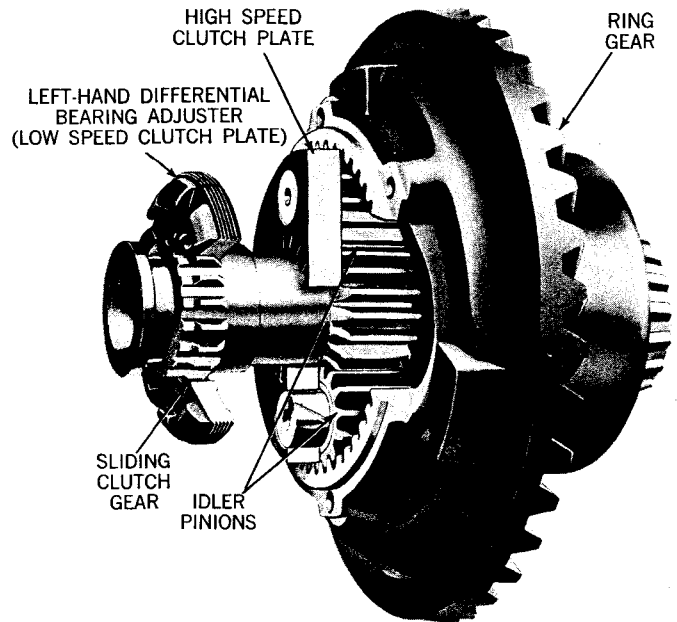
Sliding Clutch Gear Position for Low Axle Ratio
